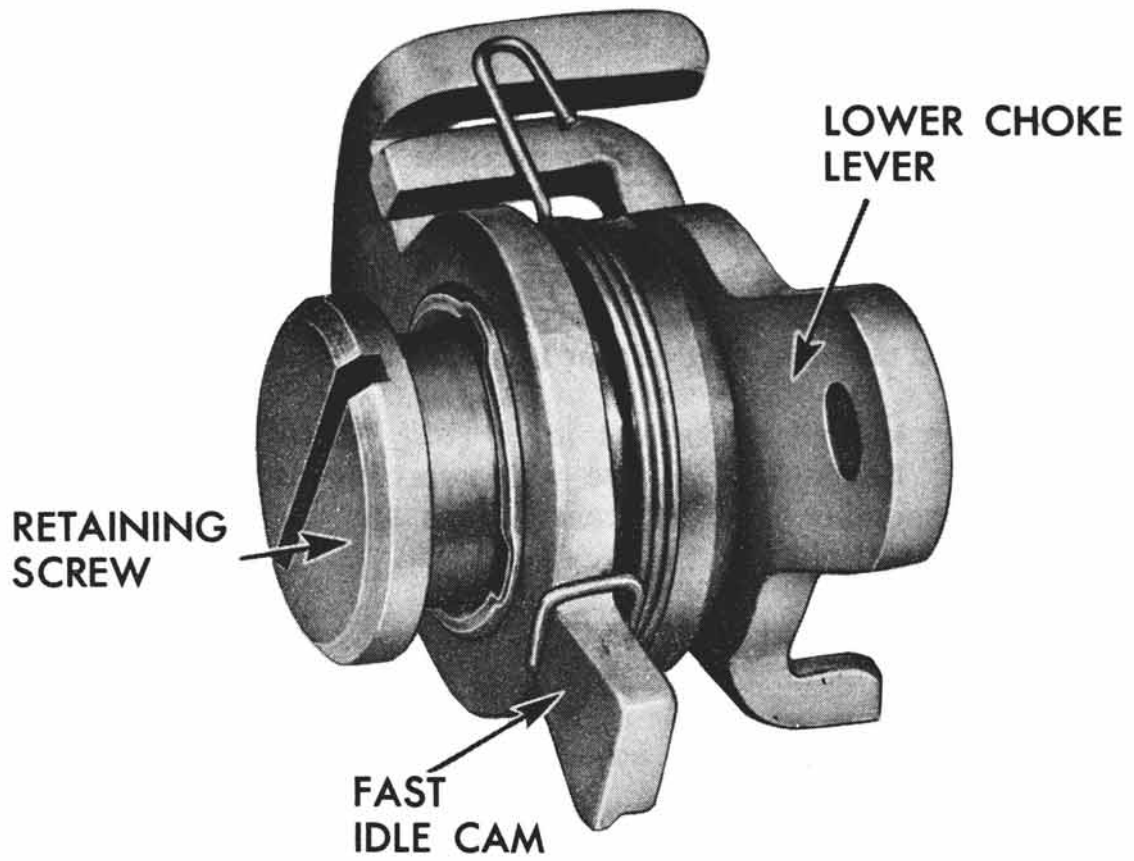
C Assembly of Fast Idle Cam and Lower Choke Lever
